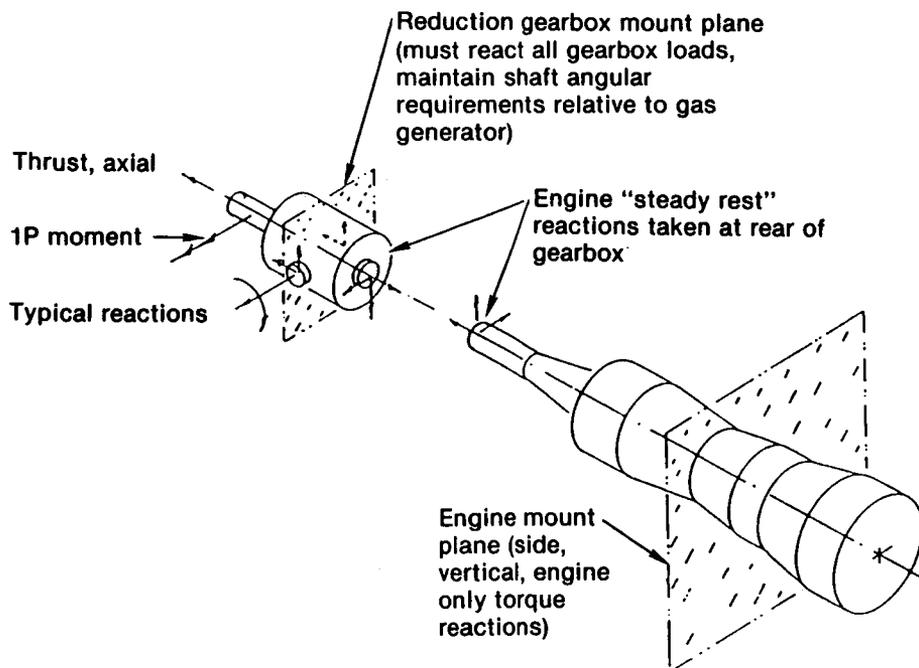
Schematic Drawing of the "Partially Independently Mounted" Reduction Gear and Engine Mounting System - This system was eliminated from consideration due to excessive vibration and the complexity of the design. (J27638-21)
